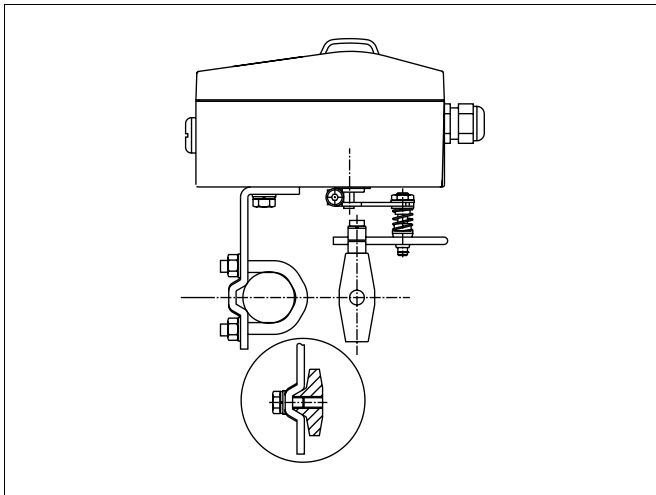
Mounting to linear actuators to DIN/IEC 534
